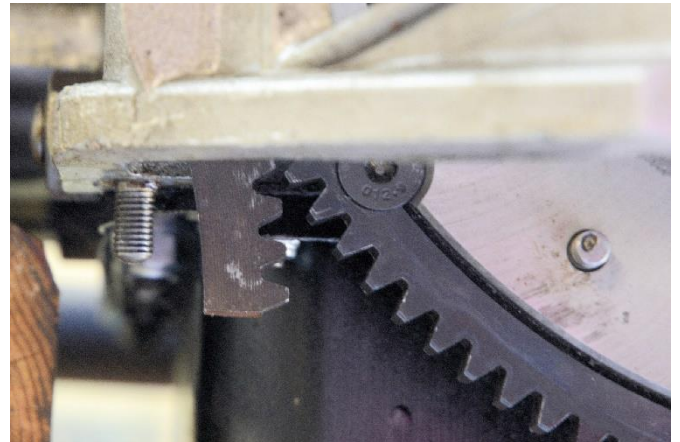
Using a piece of old ring-gear as a wedge to hold the flywheel during bolt tightening.
